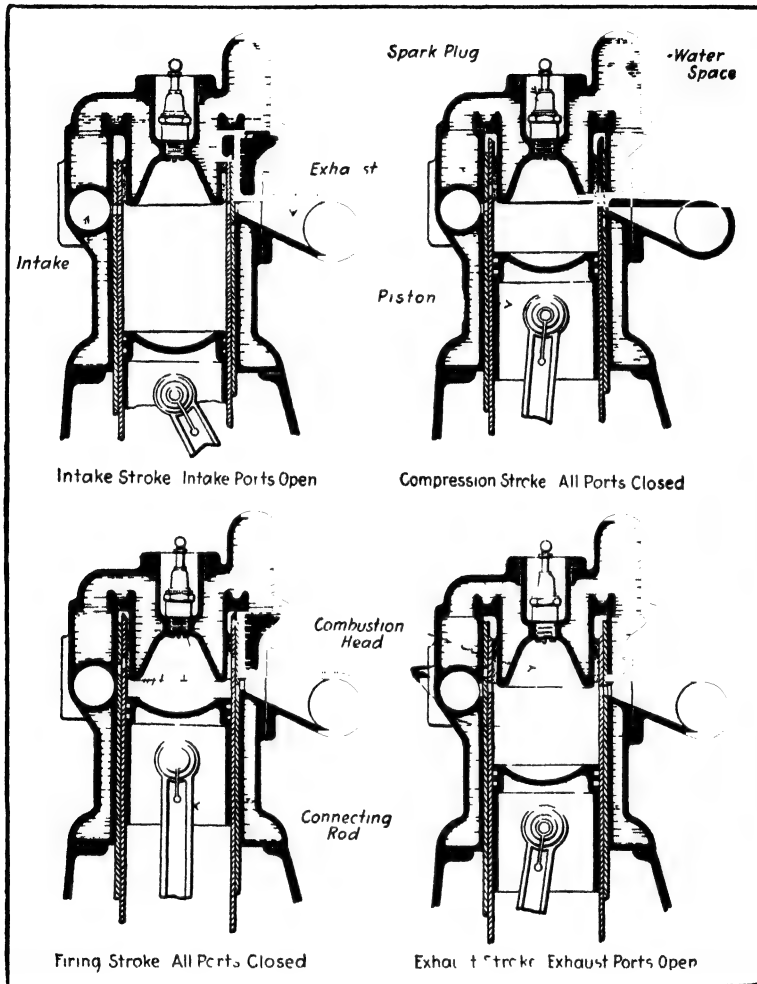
Section Through Cylinder of Knight Sleeve Motor Showing Important Parts of Valve Mechanism.
